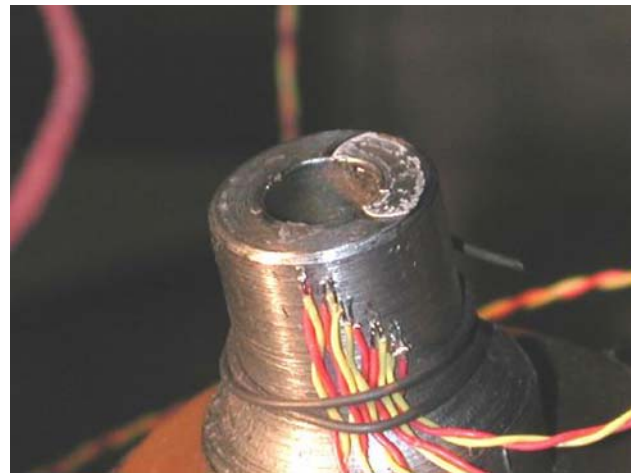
Melt profile on contact surface and relative locations of thermocouple attachments
